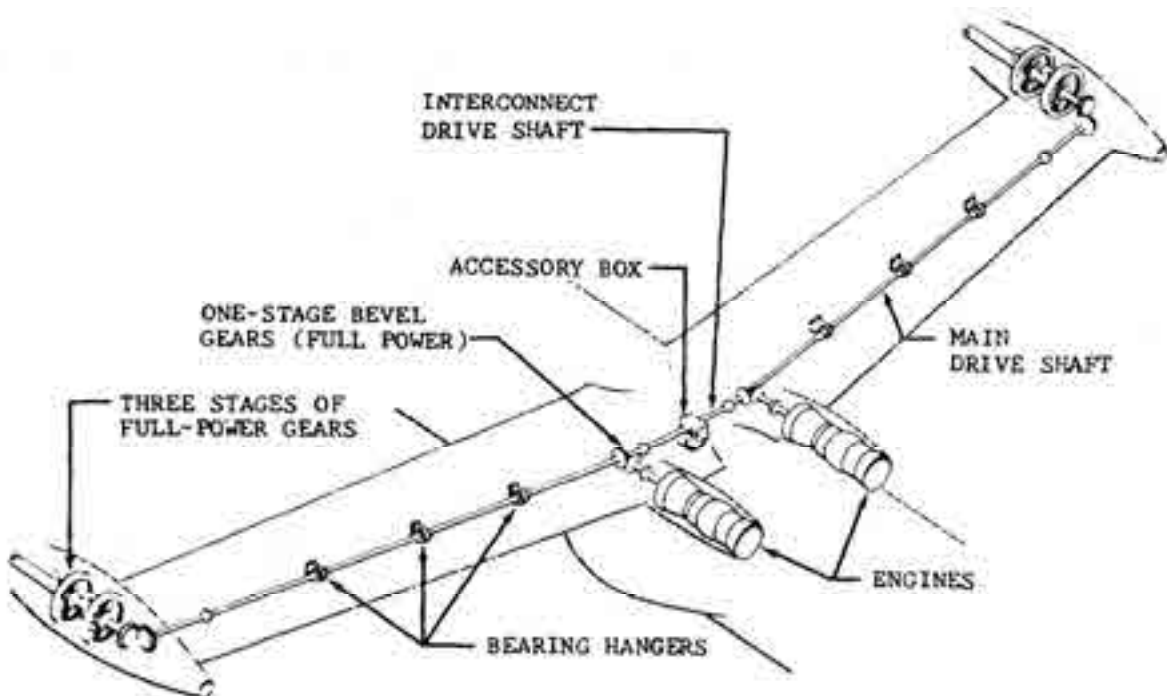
The interconnecting shafts must carry full engine power with this drivetrain arrangement [321].
